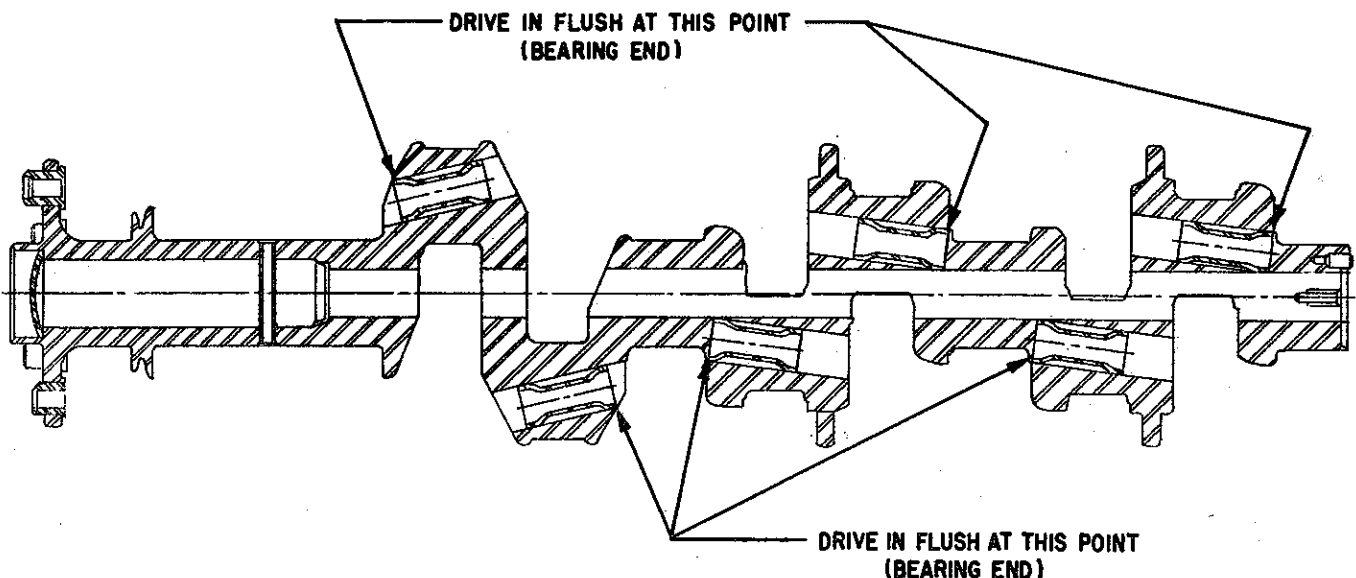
Dimensions to Drive Sludge Tubes (Six and Eight Cylinder Engines)
